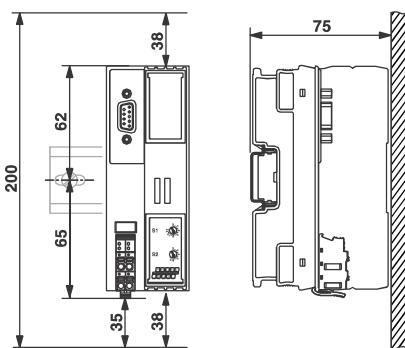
Mounting distances: bus coupler and AXC 105x controller (dimensions rounded)
